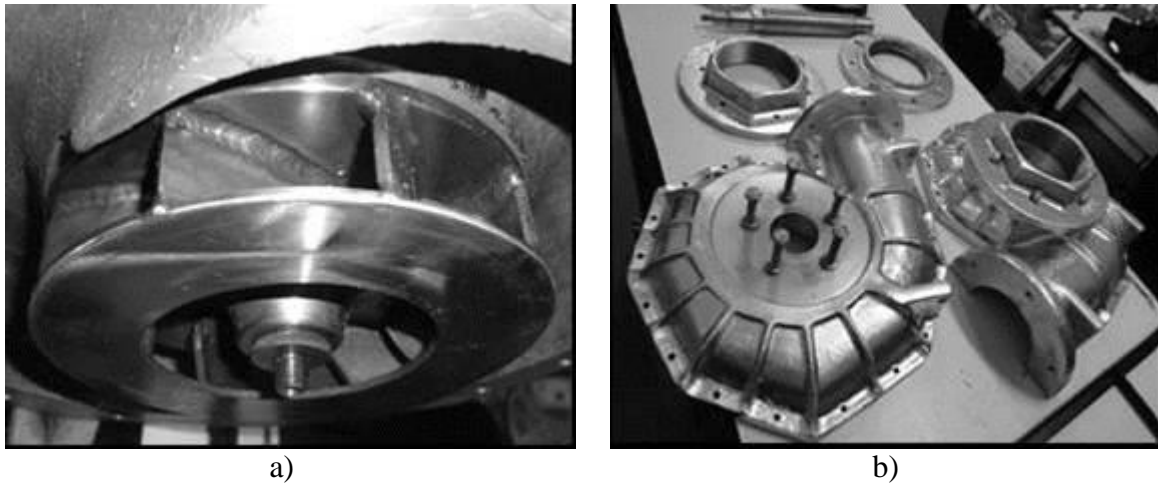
a) View of blades welding details at the rotor's lower disk. 3 b) Casing and suction and output flanges (Source SEREA 2012, Nascimento et al)
